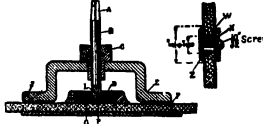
APPARATUS FOR BORING LARGE HOLES IN GLASS. Fig. 2—METHOD OF REPAIRING CRACKED PLATE GLASS.
